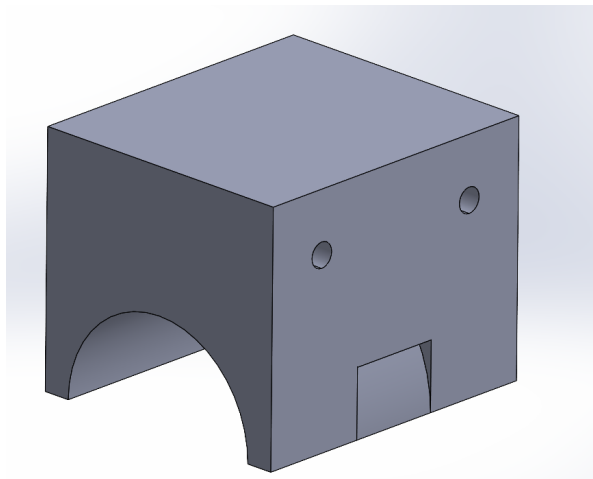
Isometric view of the 3D-printed PLA handlebar mount, showing the clamping geometry and bolt through-holes. Additionally a slot is present for a hoseclamp to fixate the handlebar mount to the handlebar
